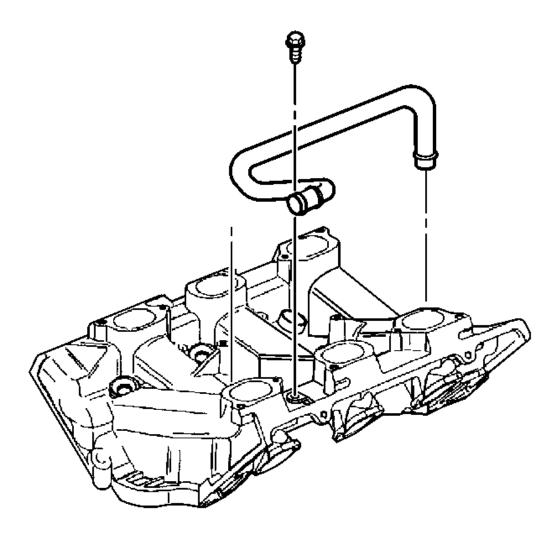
Removing Intake Manifold Coolant Pipe Courtesy of GENERAL MOTORS CORP.
